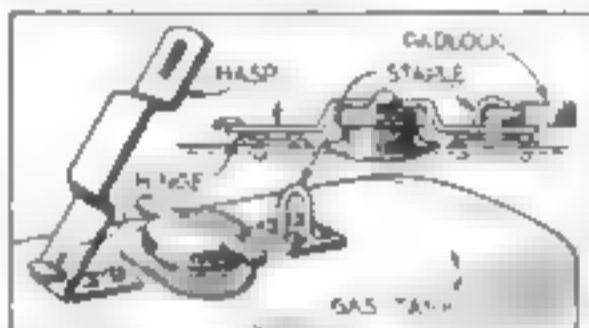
Locking your gasoline filler cap in this way will prevent those mysterious losses of gasoline that sometimes occur on motor tours
